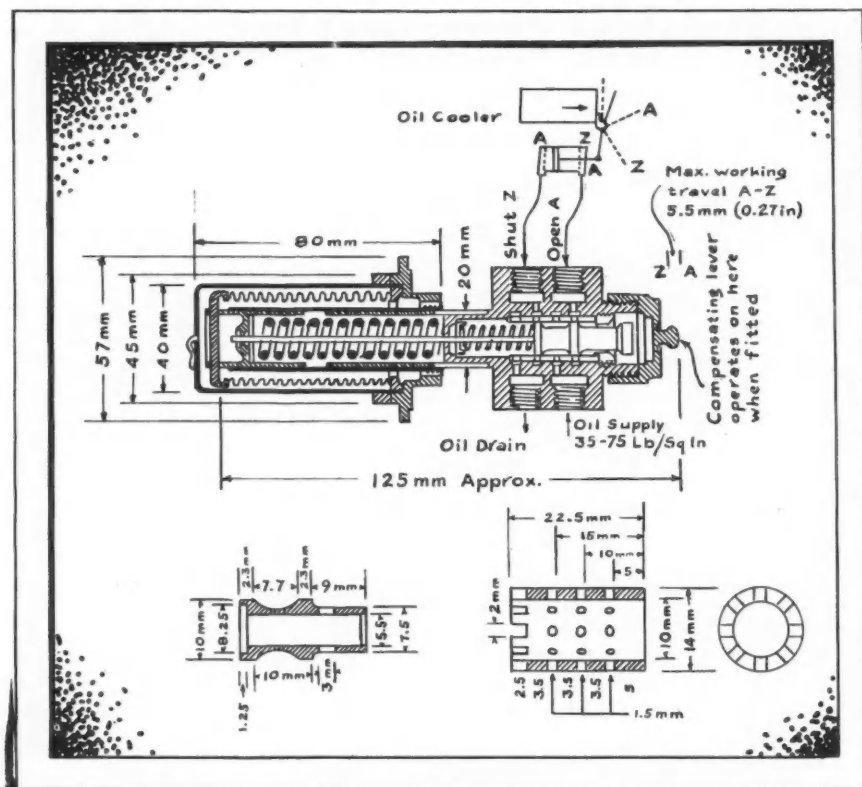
Control thermostat of the servo for oil-cooler flaps of Me 109 F<sub>1/2</sub>
